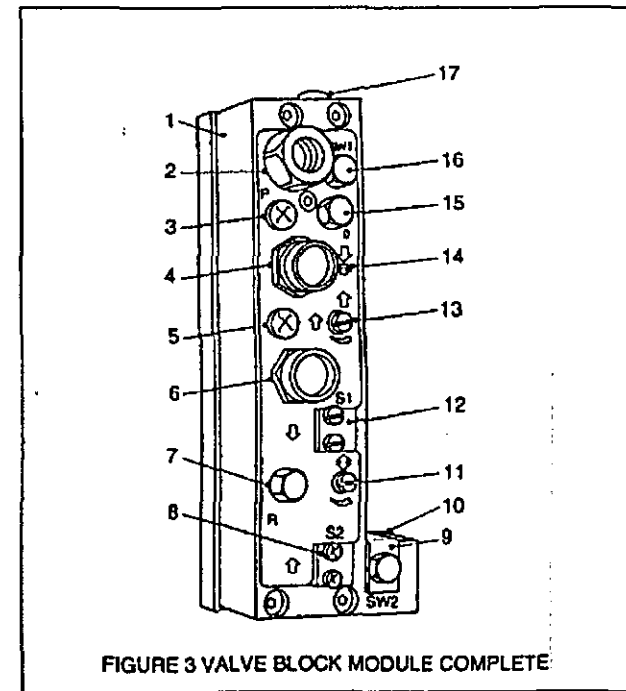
VALVE BLOCK MODULE COMPLETE
